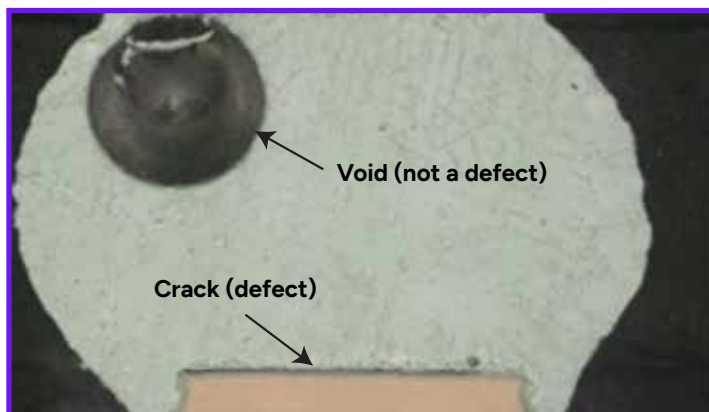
Stress induced crack in BGA corner ball solder joint following the soldering process
